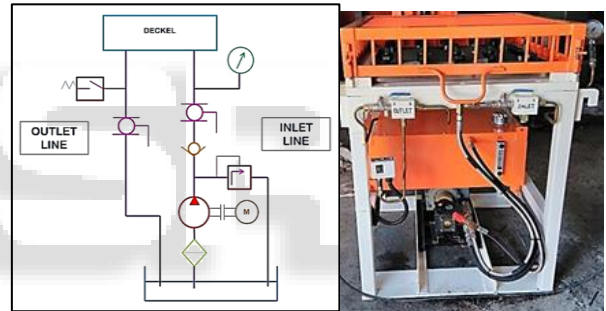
Schematic and actual hydraulic circuit of machine. The hydraulic circuit shows two lines inlet and outlet. Inlet line consists of filter, pump, PRV, check valve, ball valve and pressure gauge, outlet line has pressure switch which signals the hooter in case of excess pressure. Initially both inlet and outlet ball valves are kept open.
